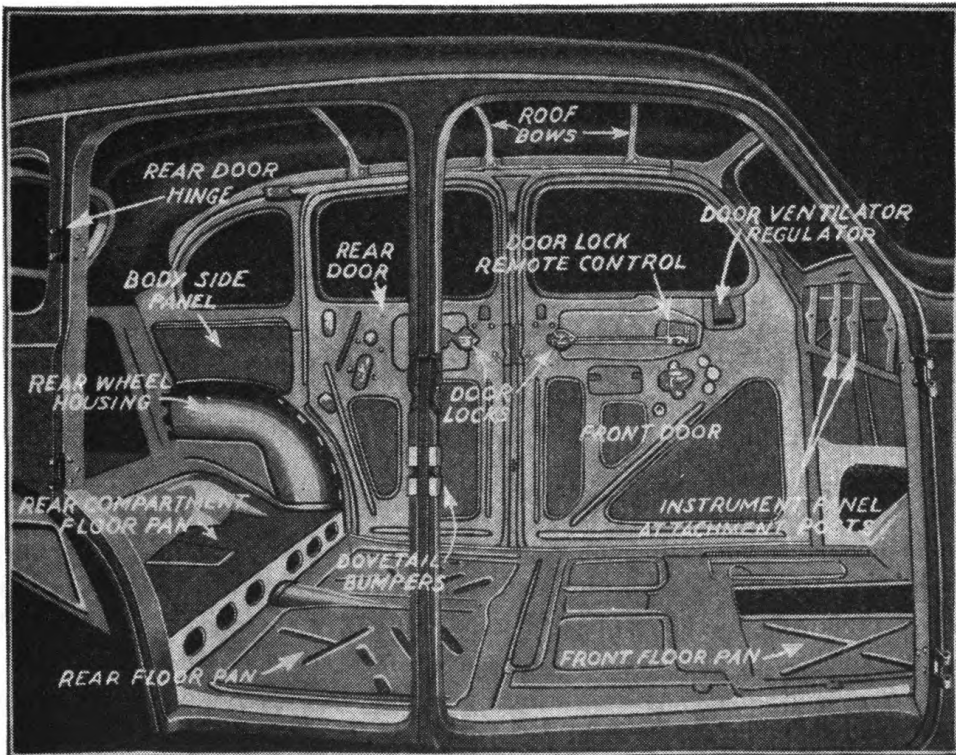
All steel body construction showing panels, stampings, and fittings.
